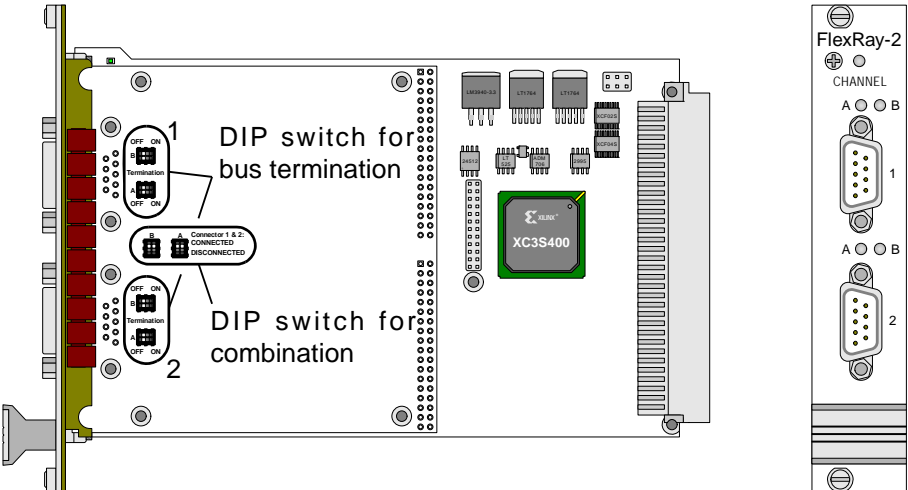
Pro II-FlexRay-2 Rev. E: PCB and front panels
